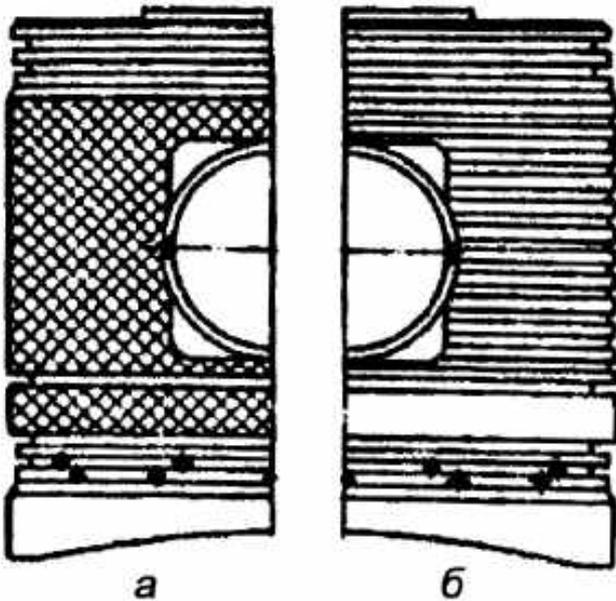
Pistons: a – intake piston; b – exhaust piston
